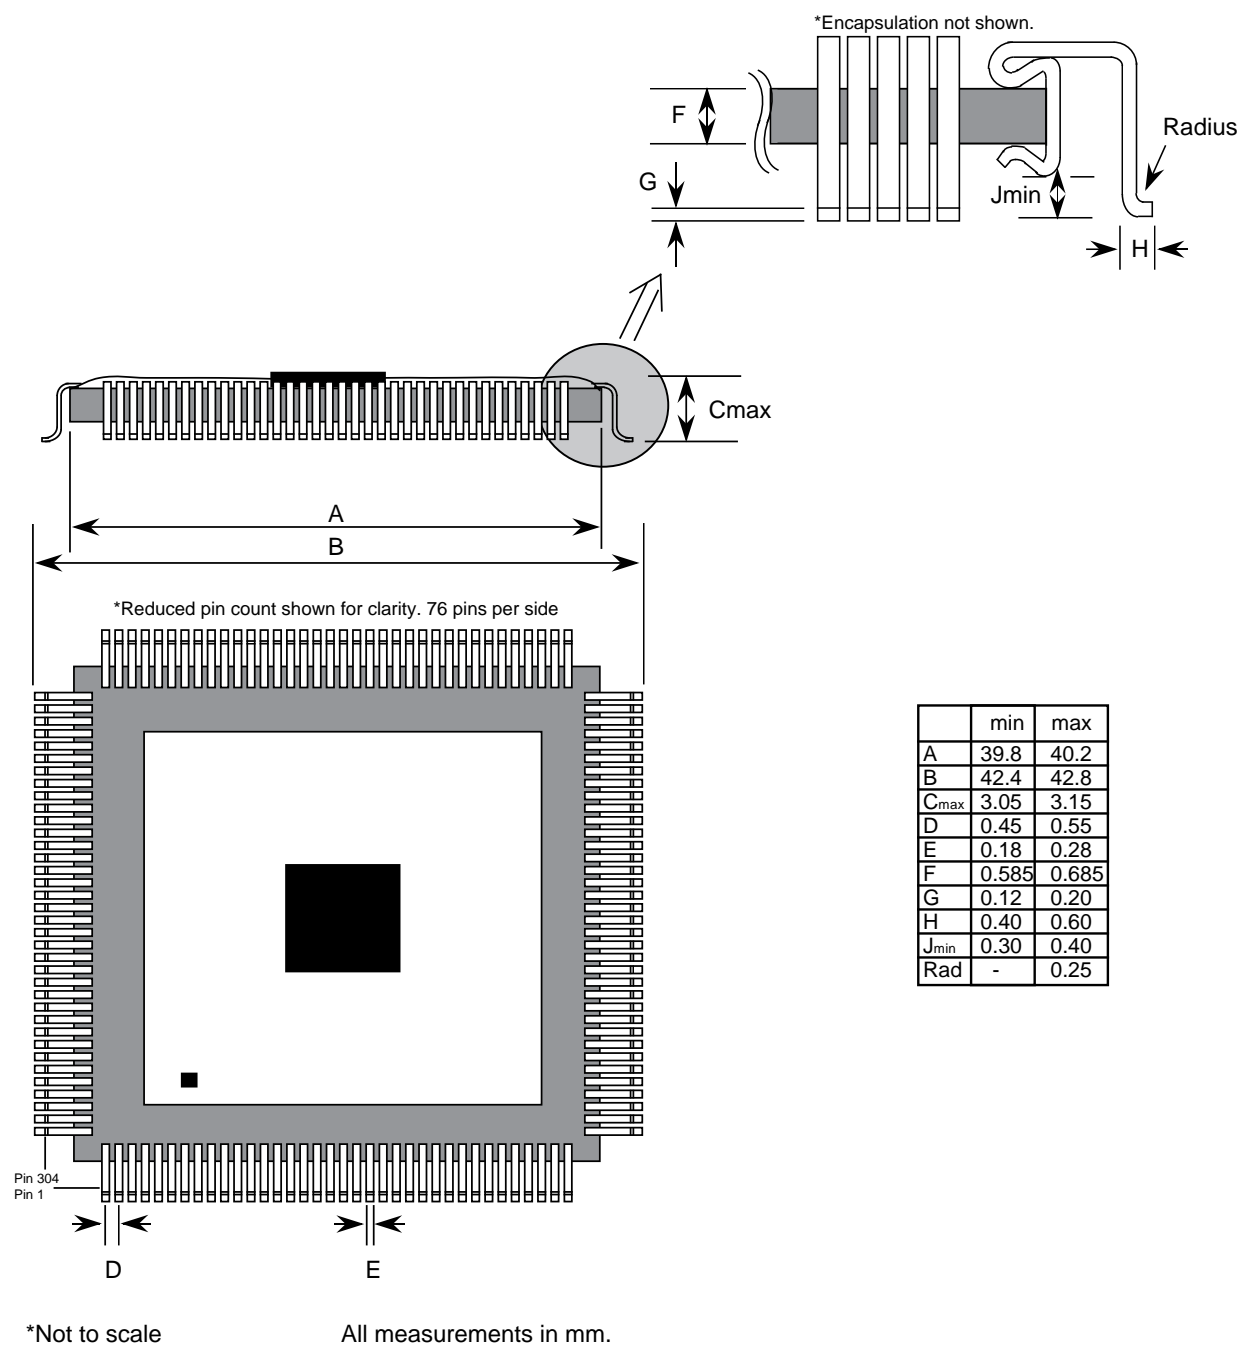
Mechanical Dimensions of the PowerPC 601 Microprocessor Package
